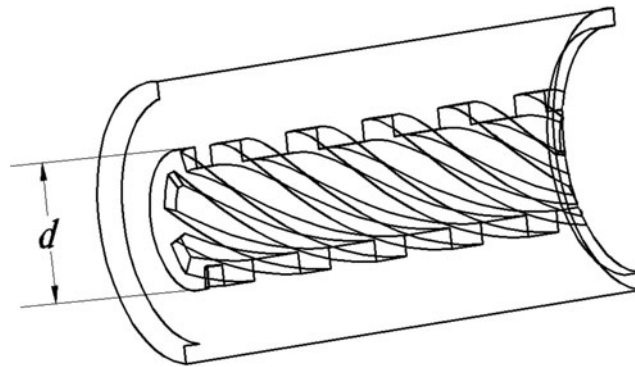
Bottom diameter of the inner spiral groove of an inner spiral robot.
